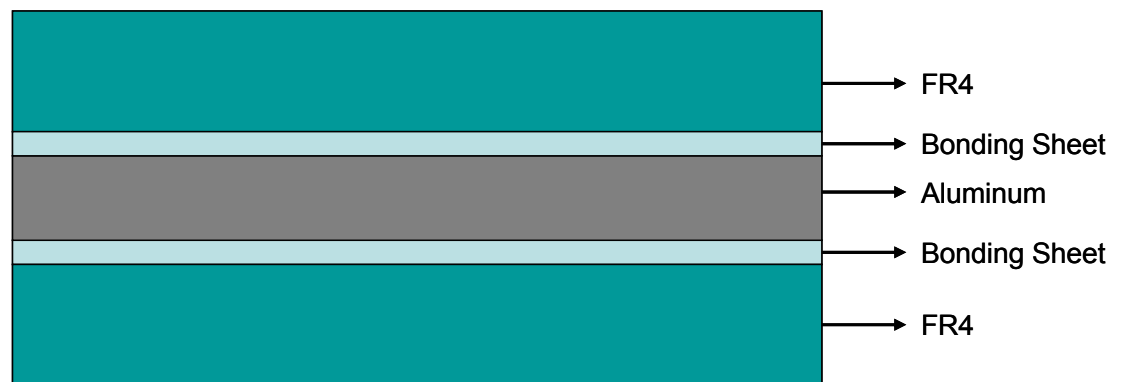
Schematic of the PWB used for PBGA package assembly
